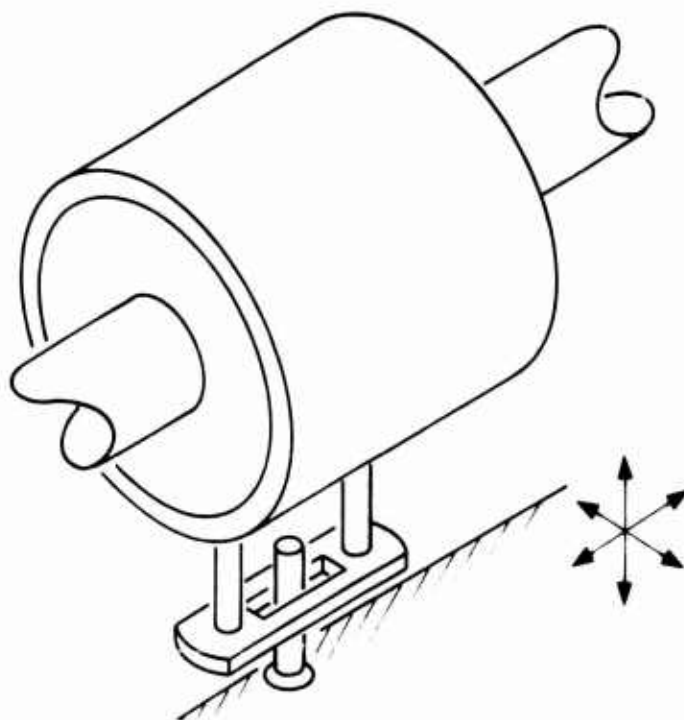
Mechanism To Prevent Torque Sensor Housing Rotation.
